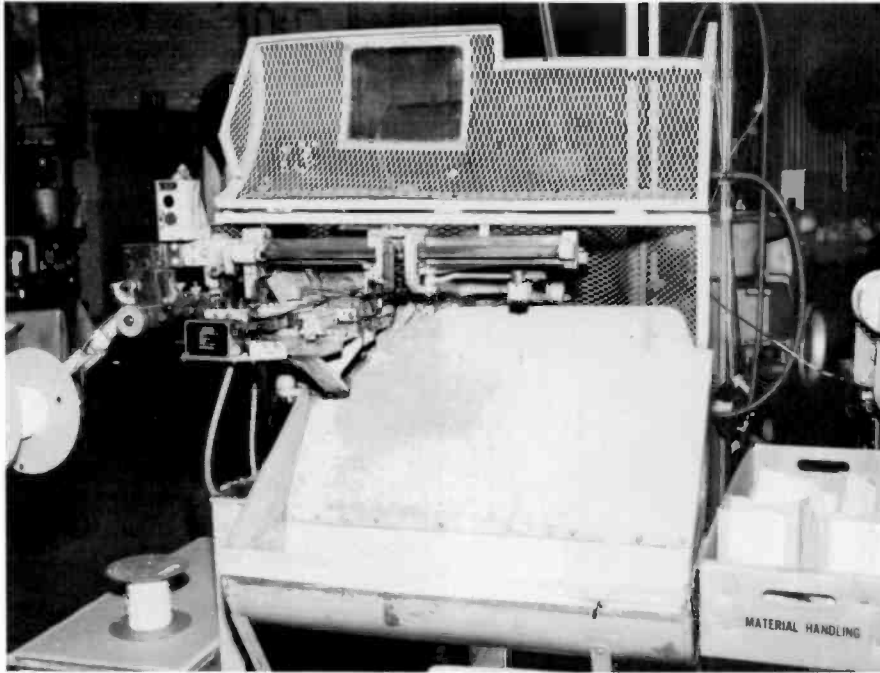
Automatic wire cutting and stripping equipment can cut and strip wires up to 30 gauge to predetermined lengths.
